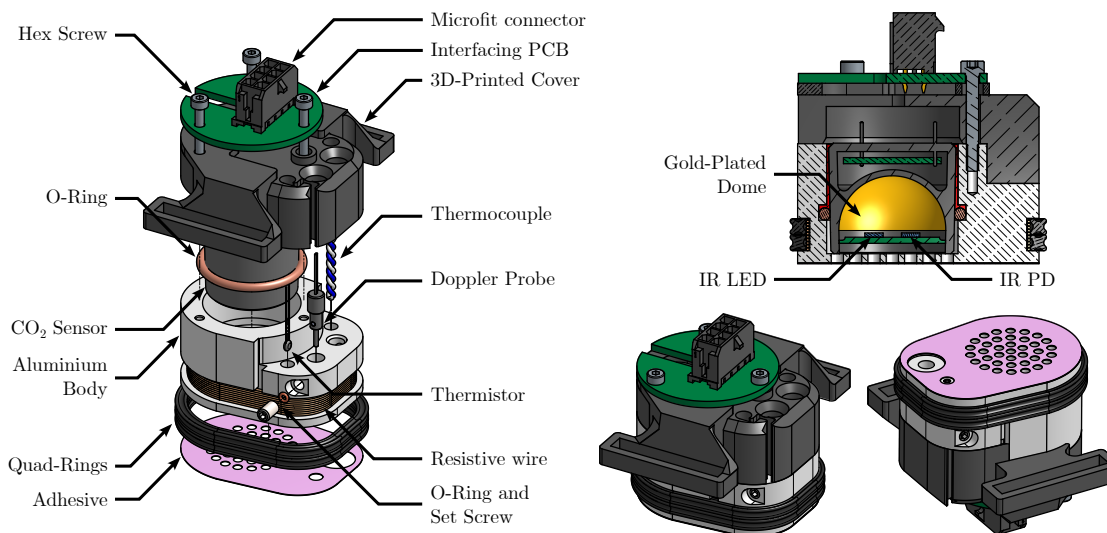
Detailed views of the sensor. Left: exploded view, detailing its different parts. Top right: cut view, showing the inner functioning principle of the CO₂ sensor. Note the epoxy resin sealing, in red. Bottom right: isometric views from above, and below, of the fully assembled sensor, illustrating the grid-shaped sensor's sole.
